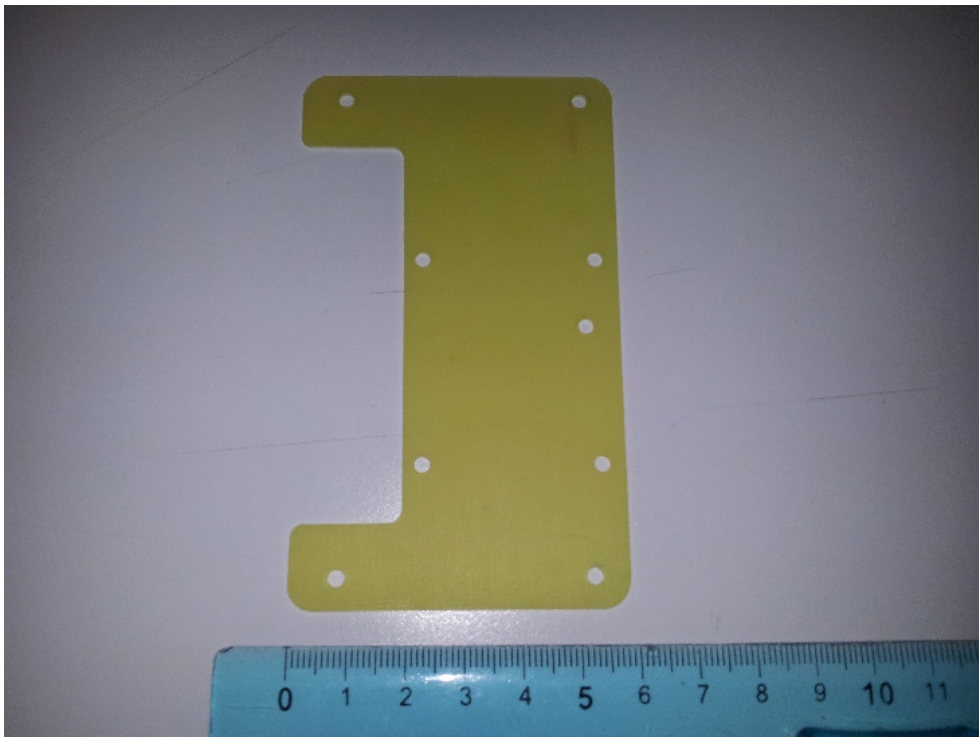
R1250IU /R1250IUFL/R1250IUB/R1250IUBFL – Support PCB
